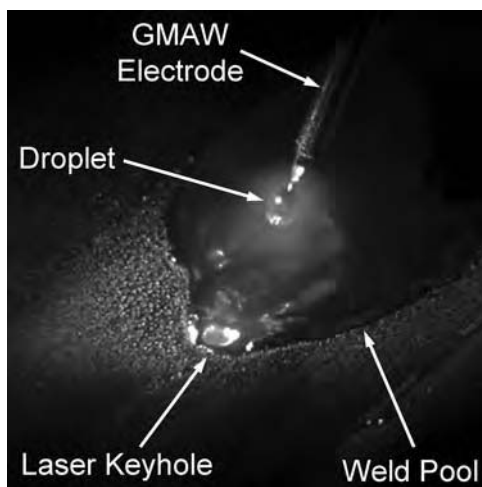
In-process video image of penetration-mode hybrid laser arc welding on steel. GMAW, gas metal arc welding. Courtesy of Edison Welding Institute
